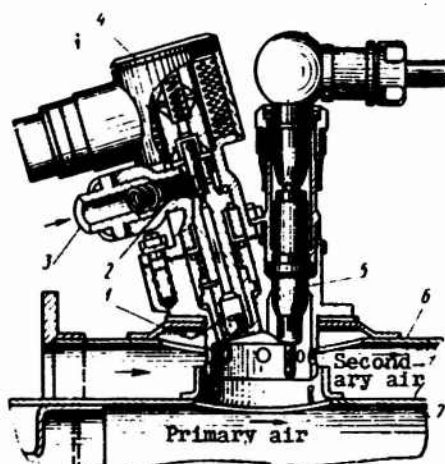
Starter: 1 - injector; 2 - filter; 3 - pipe for fuel feed; 4 - electromagnetic valve; 5 - igniter; 6 - casing; 7 - flame tube.
